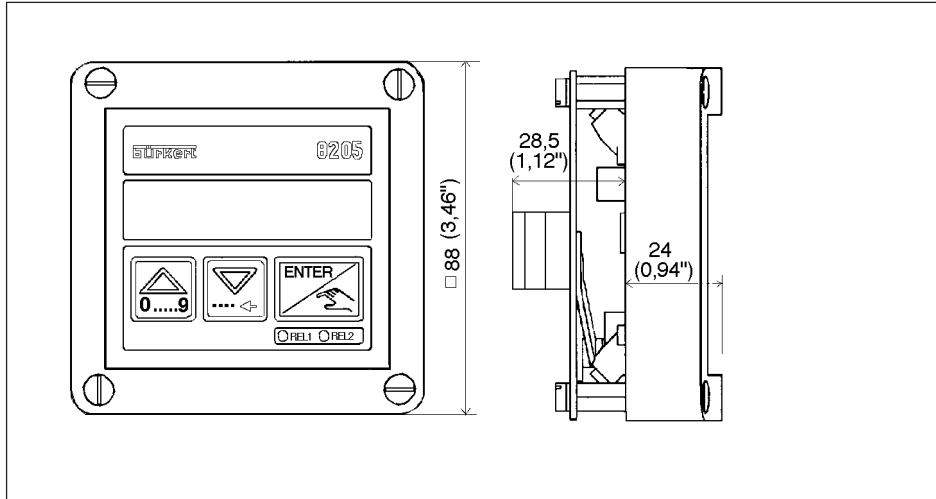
Dimensions pH transmitter type 8205 panel version
